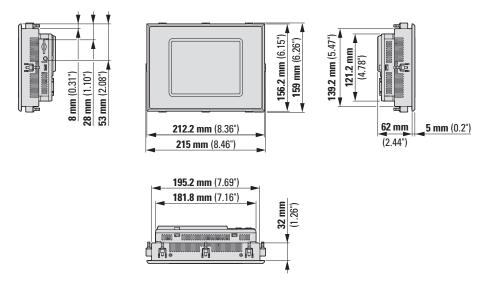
Dimensions for 5.7" front mounting devices in mm (inches)
